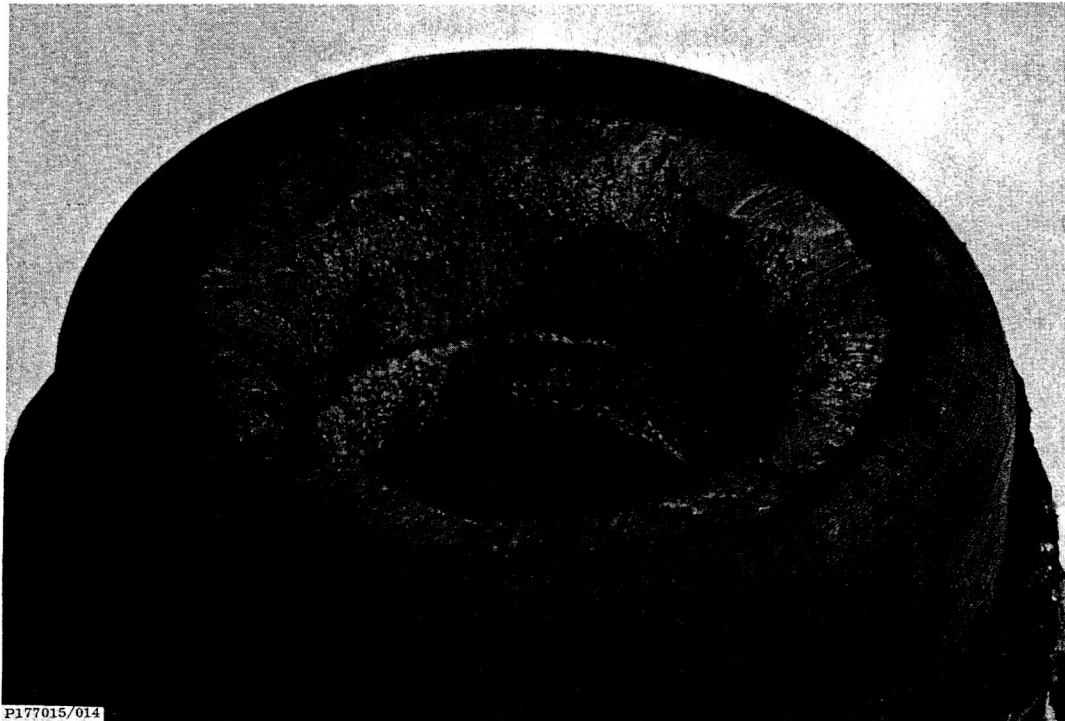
NOZZLE FROM 1000-POUND MOTOR AFTER TEST
